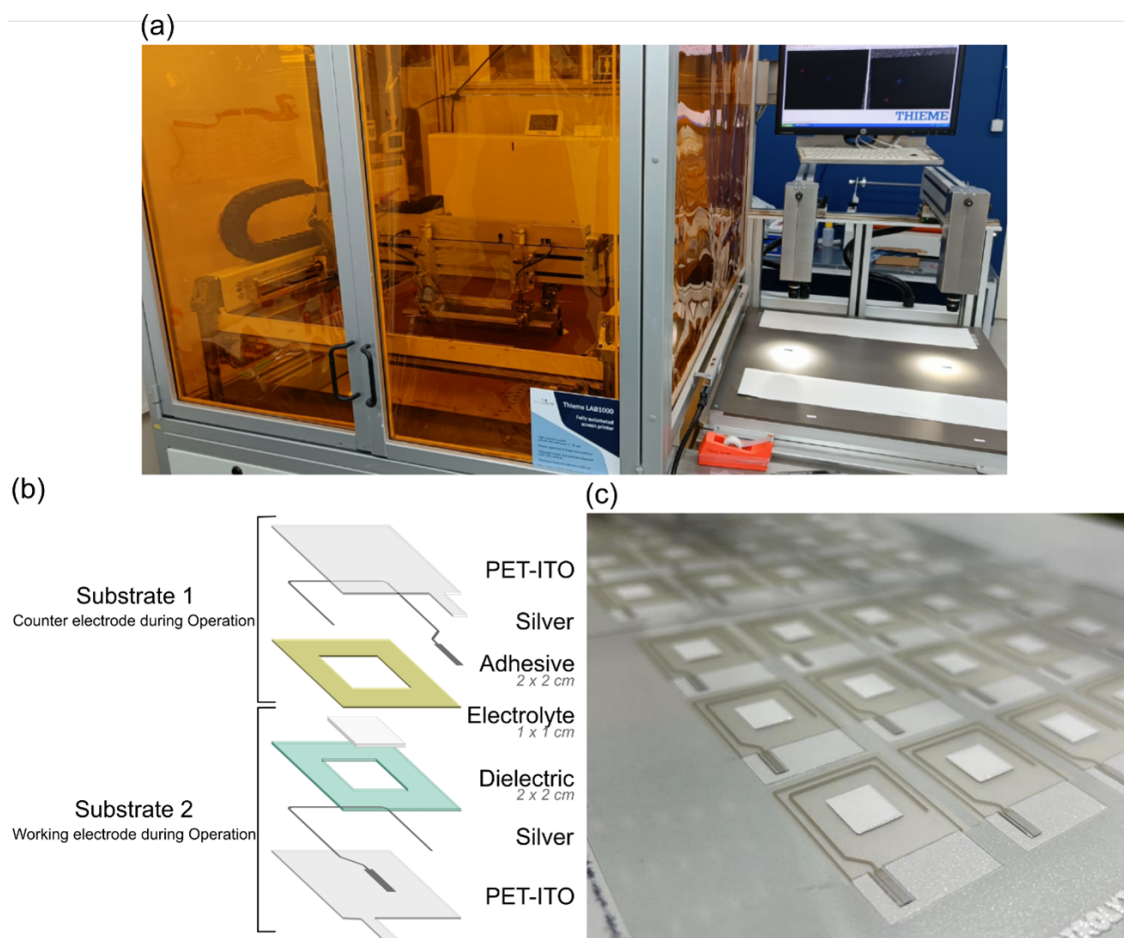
(a) Image of industrial screen printer used to print silver, dielectric, and adhesive layers. (b) Design for all the printed layers of the indicator. (c) Image of electrolyte and monomer layer immediately after printing.
